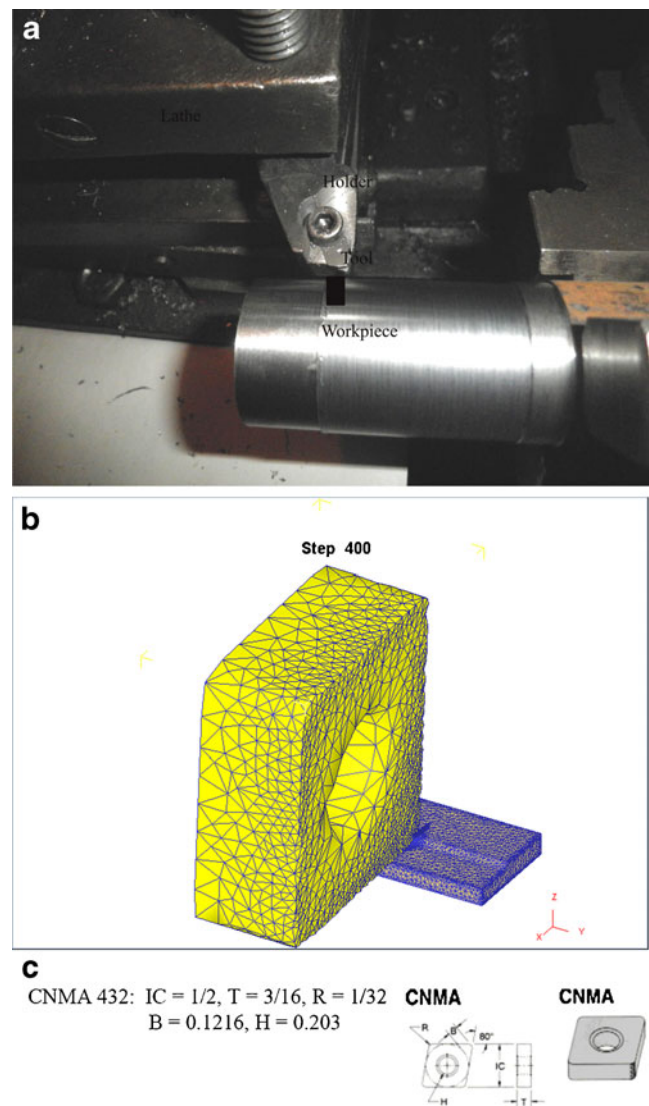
Experimental setup of H13 hard turning (a). Finite element method model of tool workpiece for the FEM simulations after a tool stroke of 4 mm (b). The CNMA tool geometry (c)
